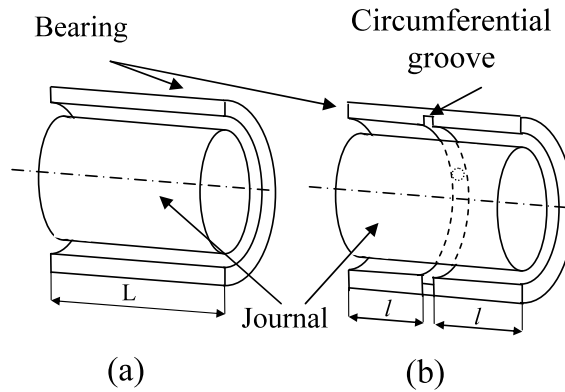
Longitudinal section of a journal bearing: (a) conventional bearing; (b) bearing with circumferential feeding groove.
